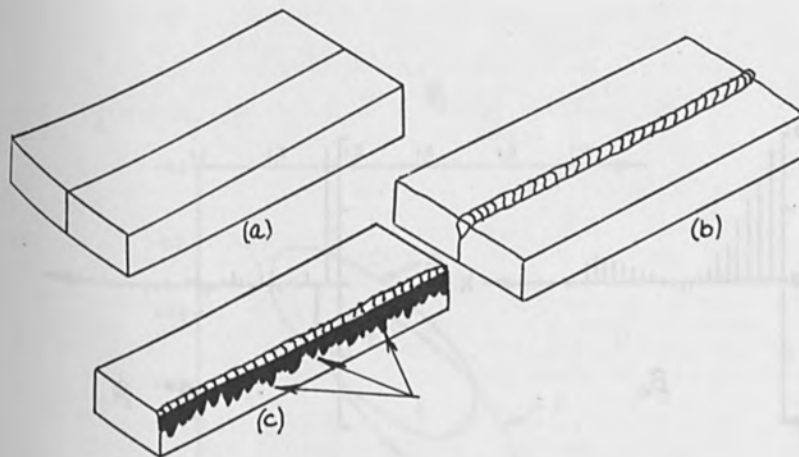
Illustration of spiking behavior in partial penetration electron beam welds. (a) workpieces before welding, (b) after welding, (c) bars broken apart exposing spiking behavior. Arrows point to typical spikes.
